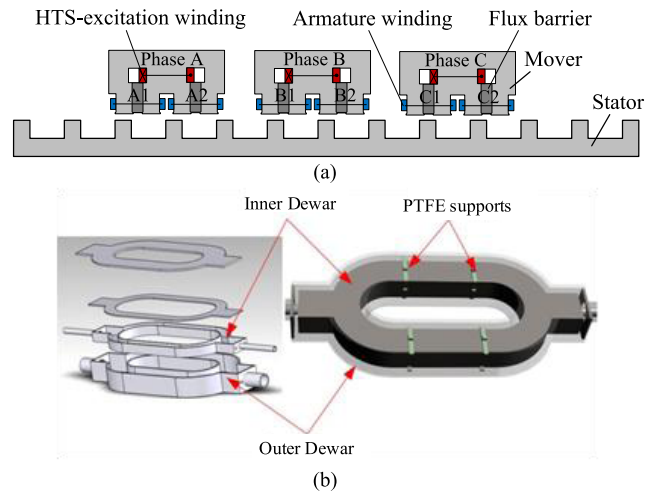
Configuration of the proposed HTS-MFSL machine. (a) Cross section. (b) Dewar assembly.
